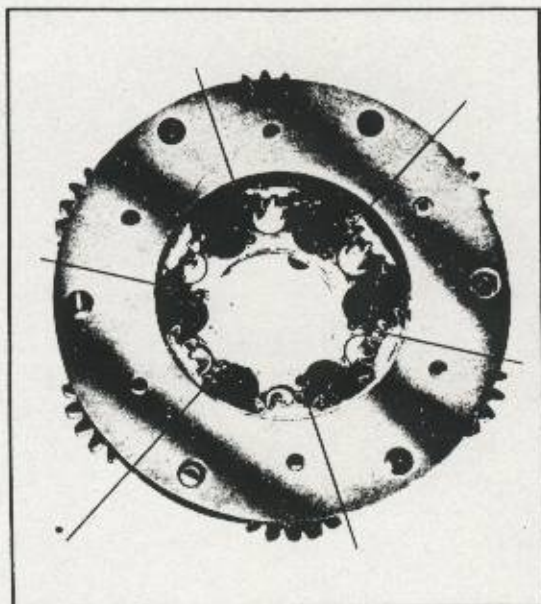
PLANET HUB REDUCTION GEAR - SLUGS LOCKING SCREWS
